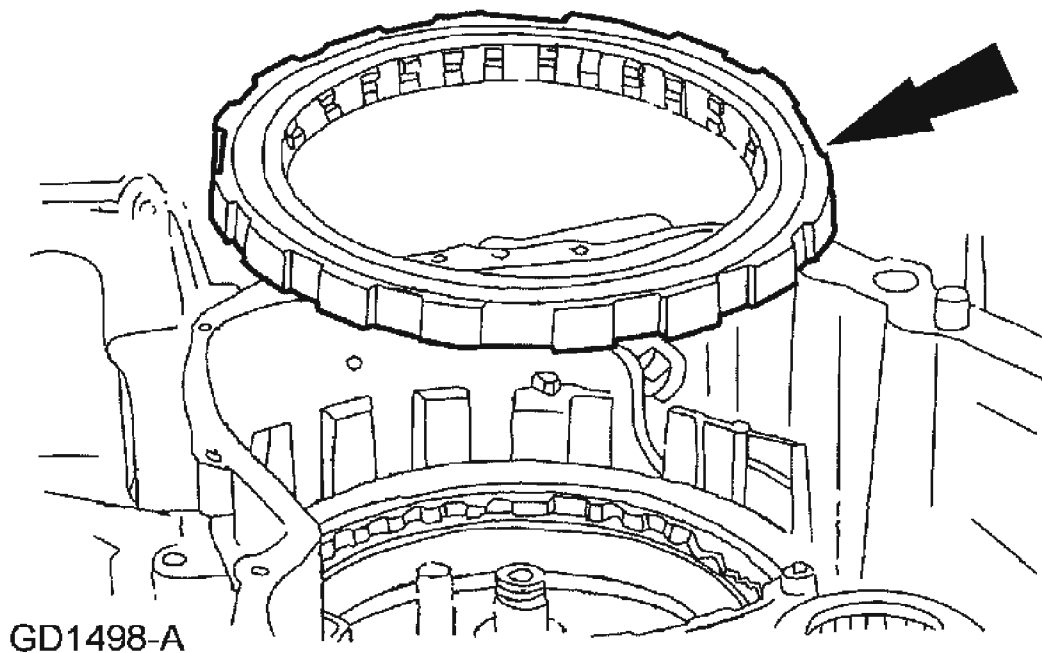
Removing Low One-Way Clutch Thrust Plate
